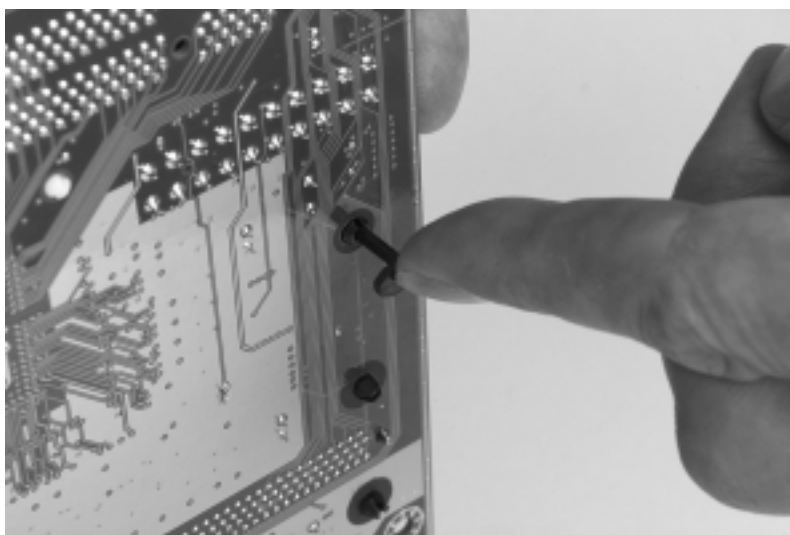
Bottom of Motherboard, Installing the Heatsink Support
